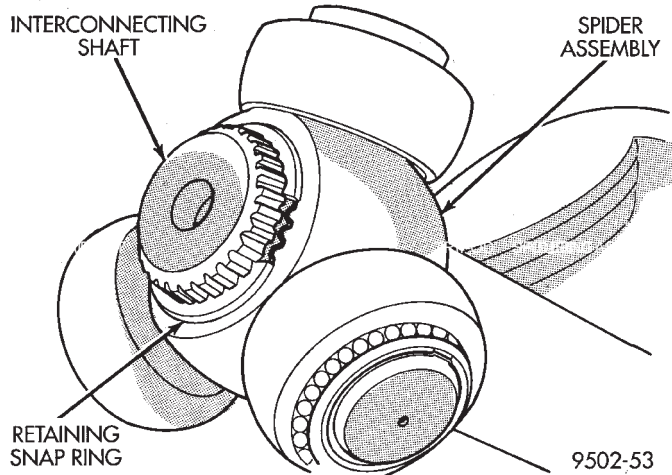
Spider Assembly Retaining Snap Ring Installed
